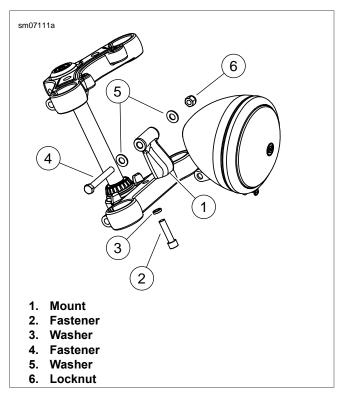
Headlamp Mount: XL 1200V/C/CP/CA/CB
